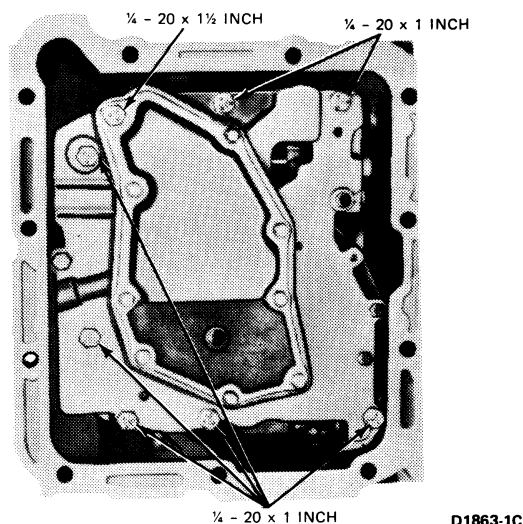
Control Valve Body-to-Case Attaching Bolts—Typical
